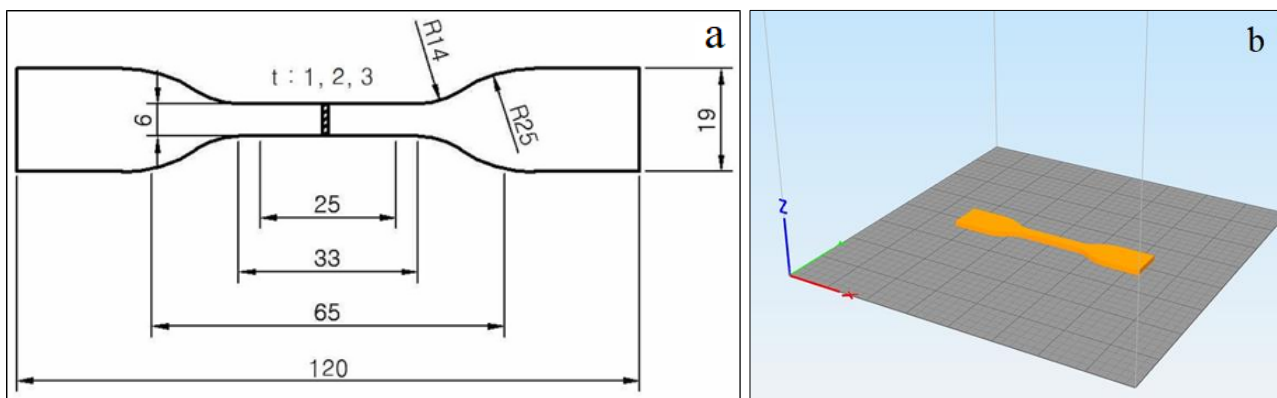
Tensile test sample (a) drawing in accordance with ASTM D-638 (b) 3D printing (ASTM, 1989)
